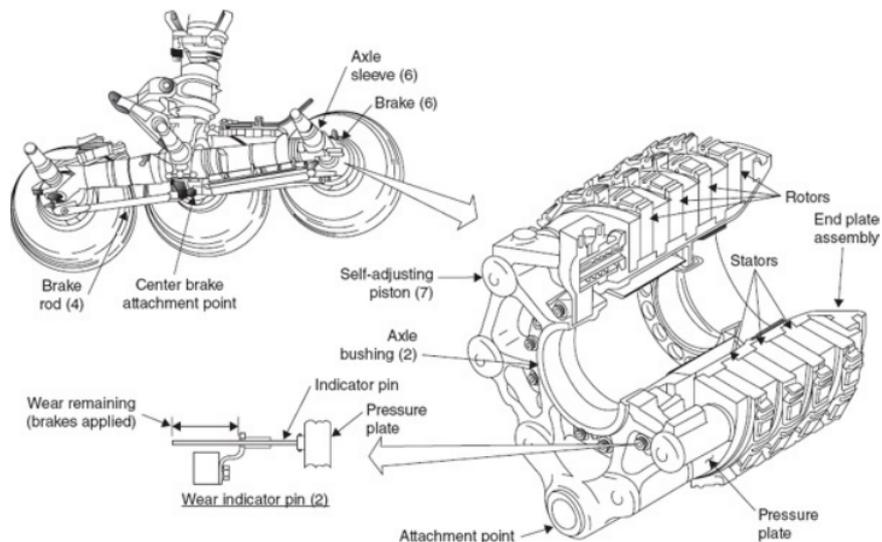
Multiple-Disk Brakes Assembly [17]
